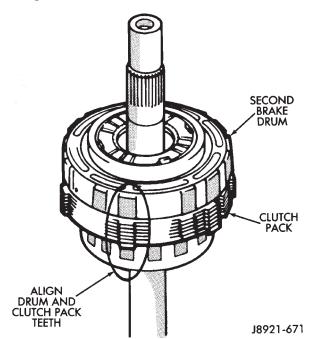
Aligning Second Brake Drum And Clutch Pack Teeth
